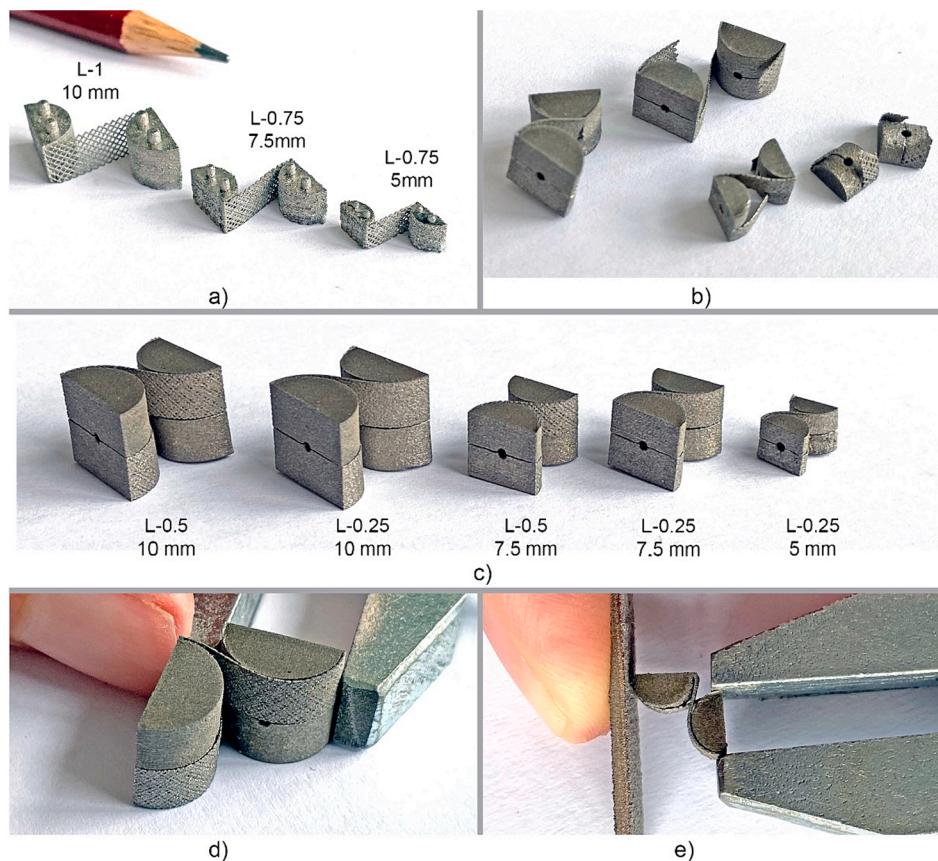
3D printed rolling contact joints. a) Single 3D printed joint halves. b) Some of the broken assembled joints. c) The successfully assembled joints. d) The 10 mm L-0.5 joint illustrating a bending angle of 90°. e) The 5 mm L-0.25 joint illustrating a bending angle of 90°.
